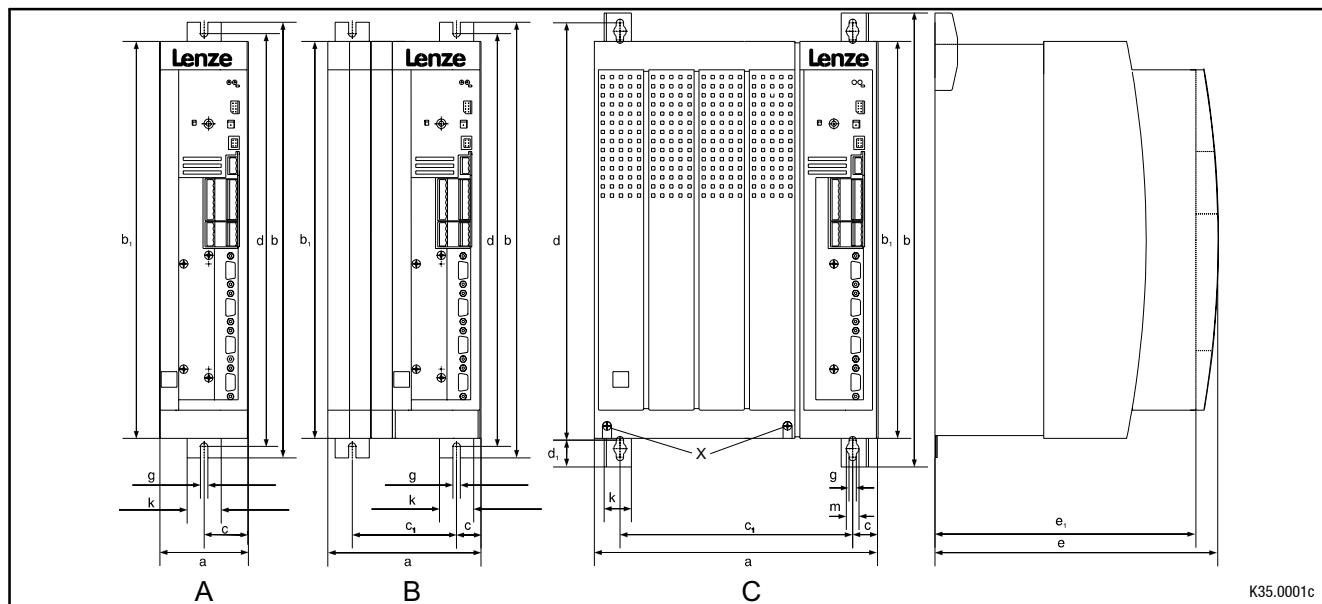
Dimensions for assembly with fixing rails / fixing brackets
